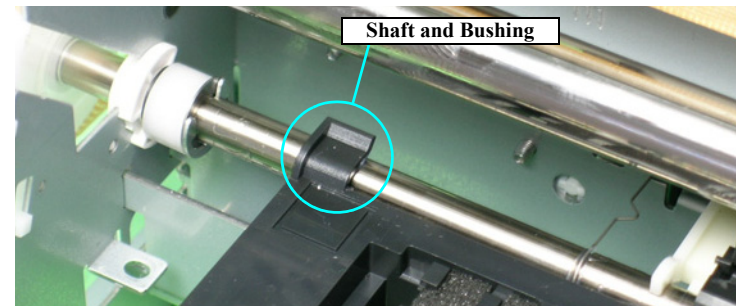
The PF Roller Shaft and the Bushing of the Front Paper Guide
